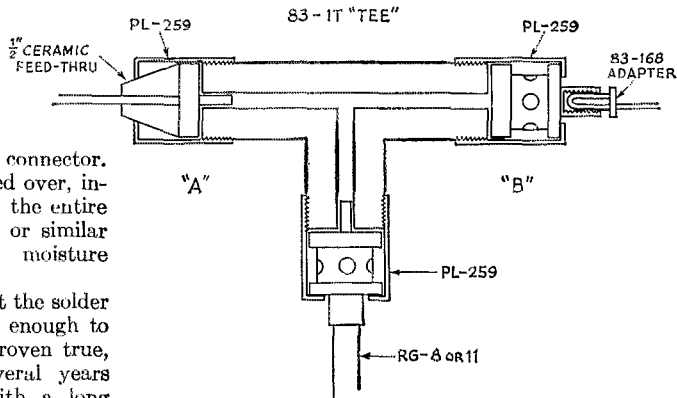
Assembly of the center insulator constructed from coax connectors.
